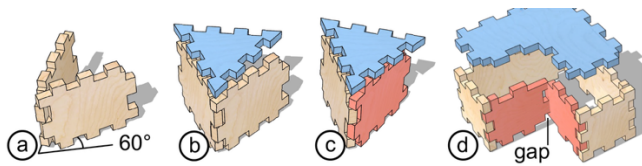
(a) A Sloppy two-part assembly can have consequences: (b) While a slightly too oblique angle can be hammered in later, (c) an overly acute-angle two-part assembly prevents the blue plate from assembling. (d) This two-part assembly is supposed to serve as the core of a concave joint. Here, angle errors and incomplete insertion bring the assembly to a halt, as the blue plate *P* does not fit the pins on the spaced-out red plates.
